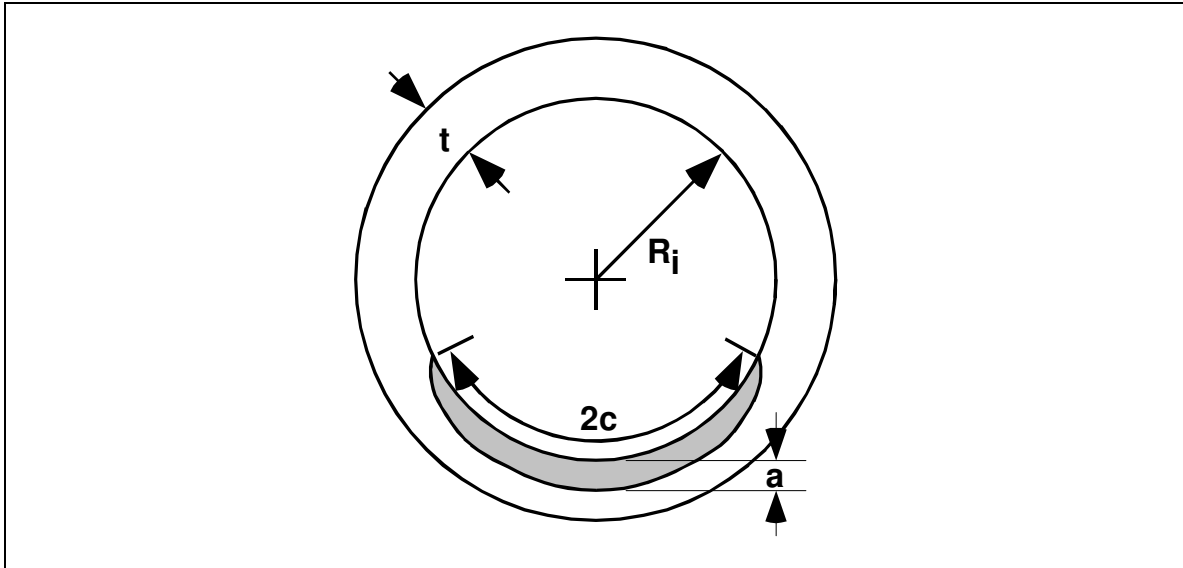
(a). Internal circumferential crack in a cylinder, crack and cylinder dimensions.
